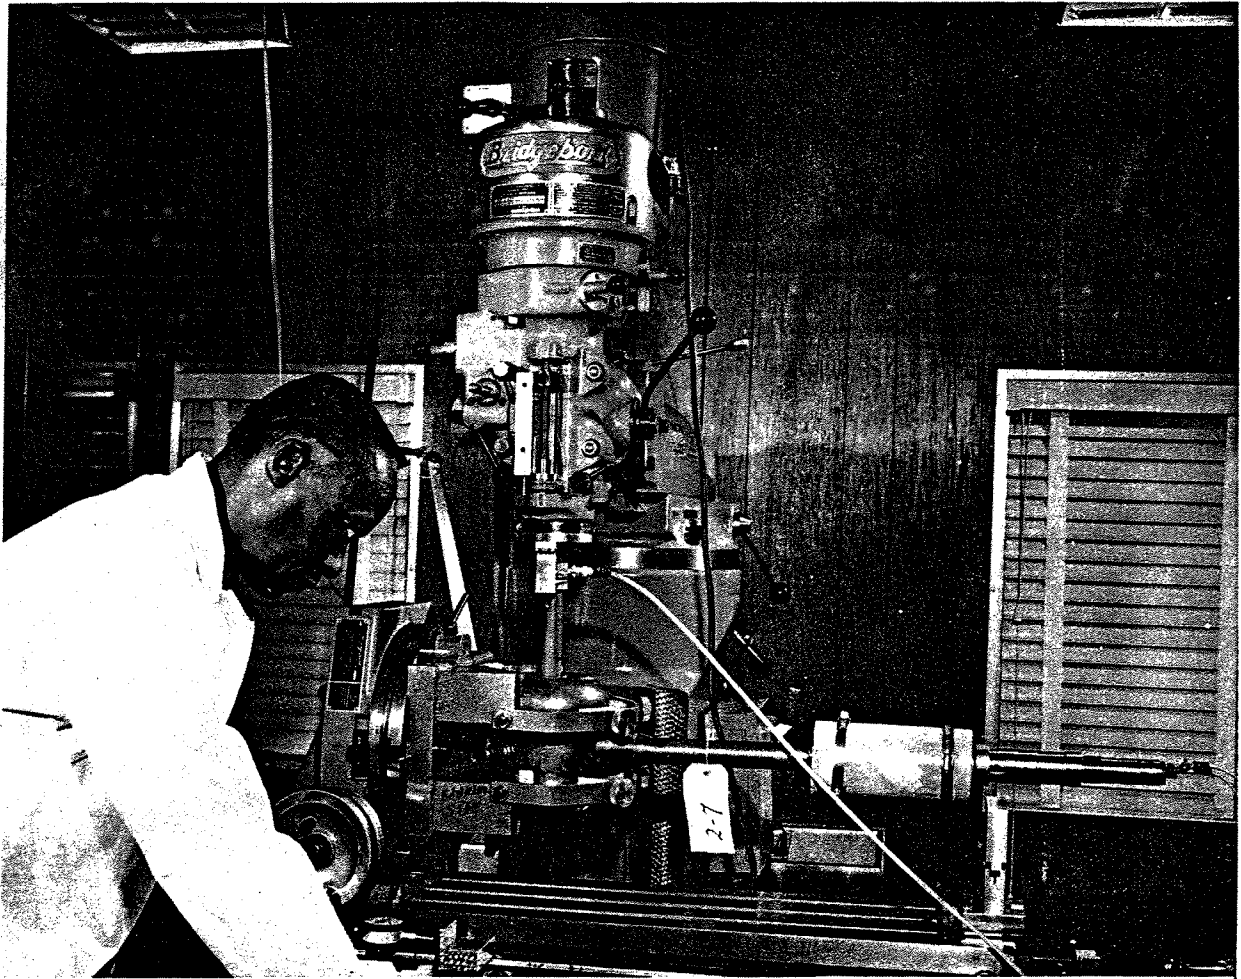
c.6 Locating magnetic centre prior to boring of drift-tube aperture.
